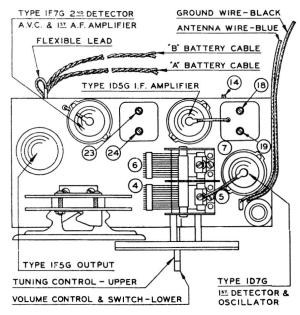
Model 420—Chassis Layout showing Aligning Positions.
